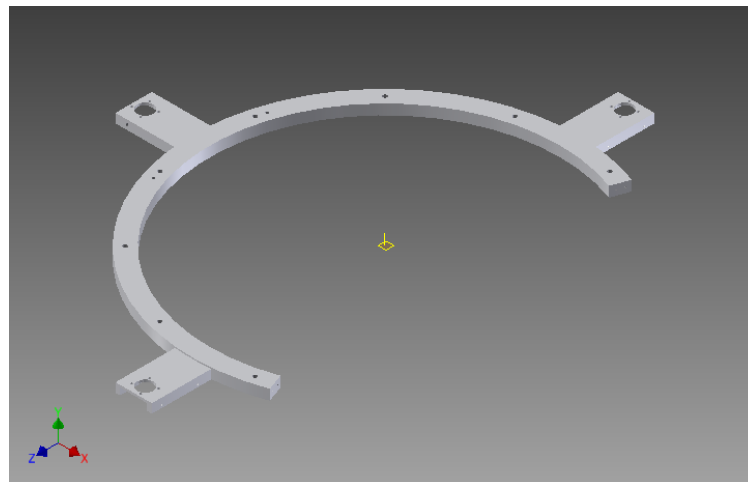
The bottom ring piece showing the custom designed tabs that hold the leveling actuators.
